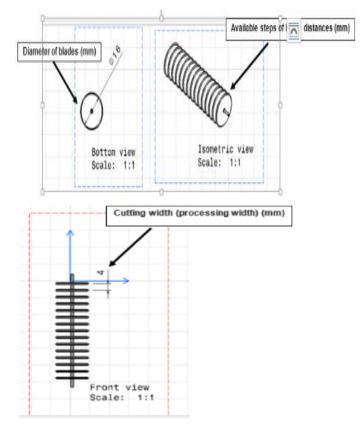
Close-Up View Of Blades Slicer Section For Automatic Meat Slicing Machine.
